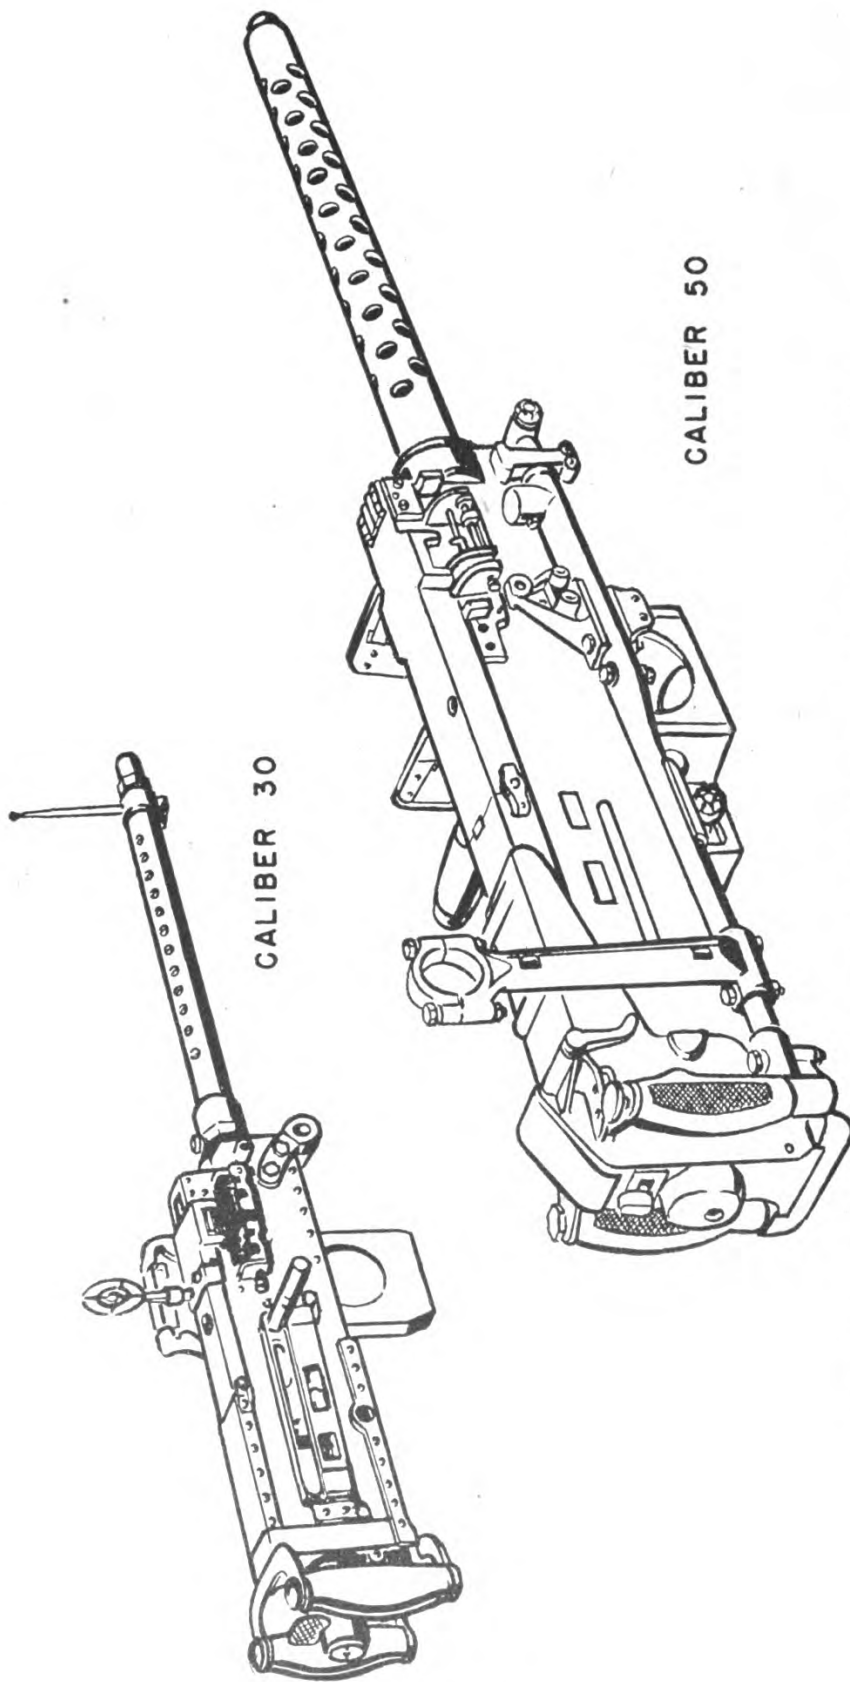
Browning machine guns, aircraft M2. Caliber .30, top. Caliber .50, bottom.
